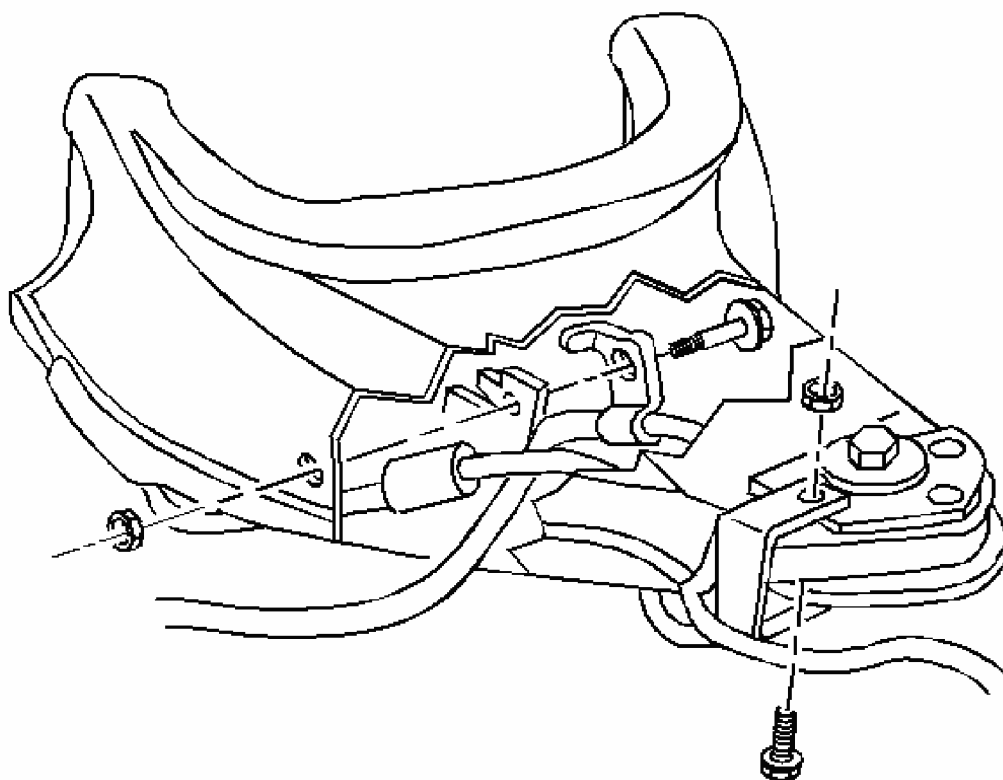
Wheel Speed Sensor Wiring Harness Bracket Bolt
